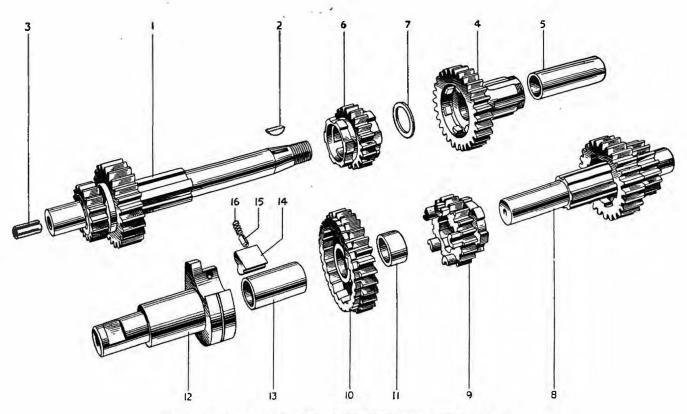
MAINSHAFT AND LAYSHAFT GEARS.
